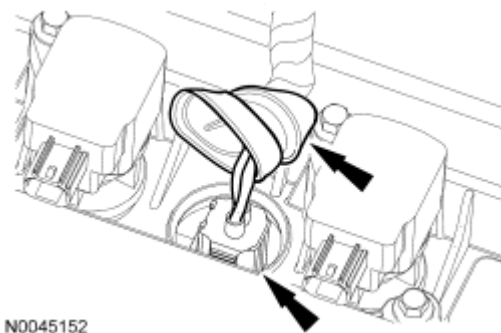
Locating Cylinder Head Temperature (CHT) Sensor Electrical Connector And Boot
